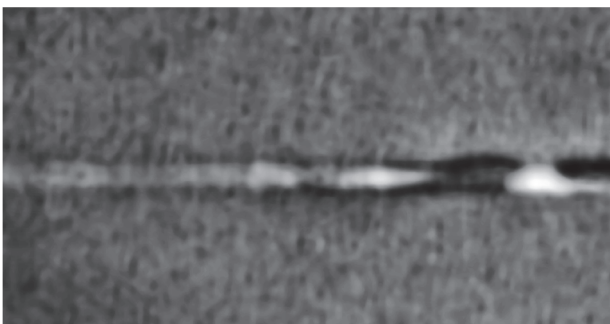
Filtering and enhancement of laser welding X-ray images
